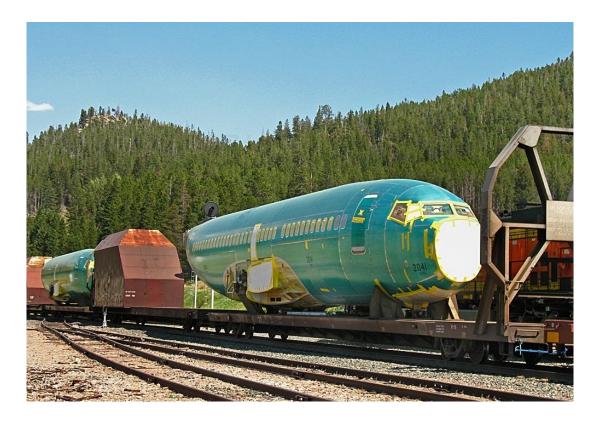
Protective coating utilized to prevent corrosion on metal airplane parts during transport
